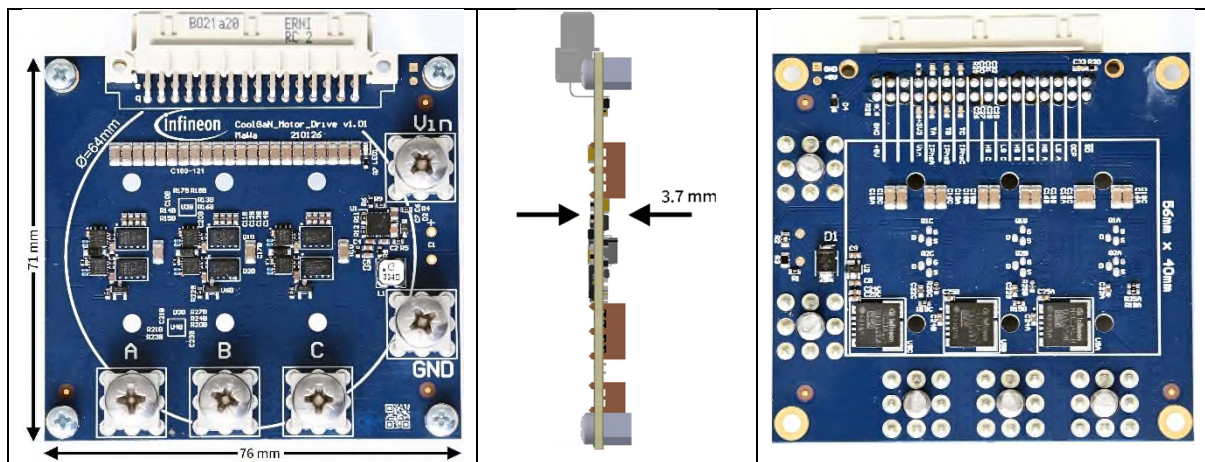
Top, profile, and side view of CoolGaN™ motor drive. Note: the entire motor drive, including DC link, current sensors, and auxiliary power supply, can be implemented in a rectangular area of 56 mm x 40 mm.
